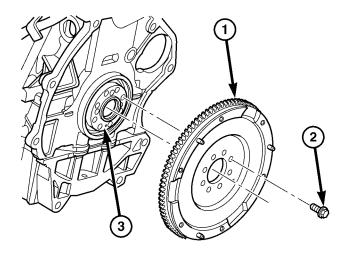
Flywheel Bolt Pattern—2.2L Turbo Diesel Engine
